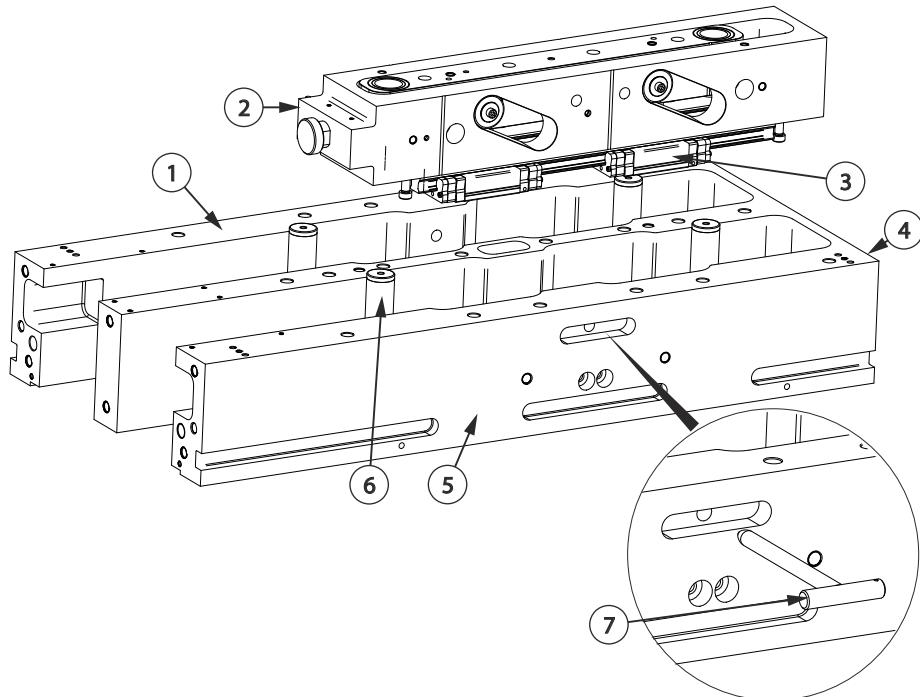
Removing the Cam Roller Assembly (Back Mounted)
